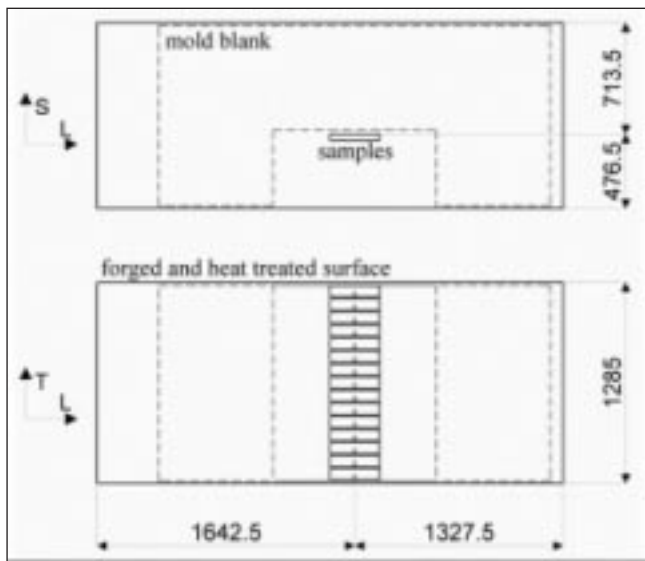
38 mm thick fracture toughness samples cut at increasing depths inside bloom C.
